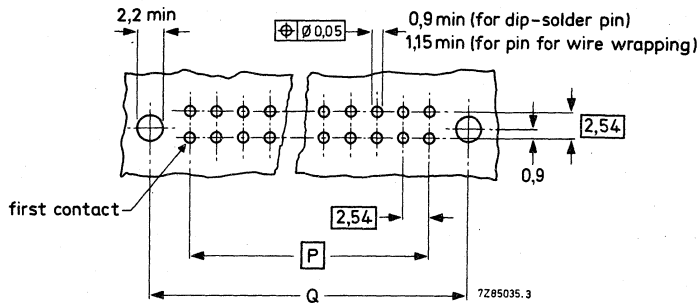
Hole pattern for male headers with straight dip-solder pins or straight pins for wire wrapping; for dimensions P and Q, see Table 10. Fixing of the male headers can be done by means of M2 screws and nuts. Mounting is only possible when the clamp/ejectors are not inserted.
